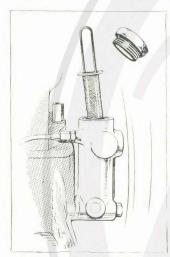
THE OIL FILTER REMOVED FROM ITS CASING ON THE PUMP OF THE 14 H.P. "STANDARD."
